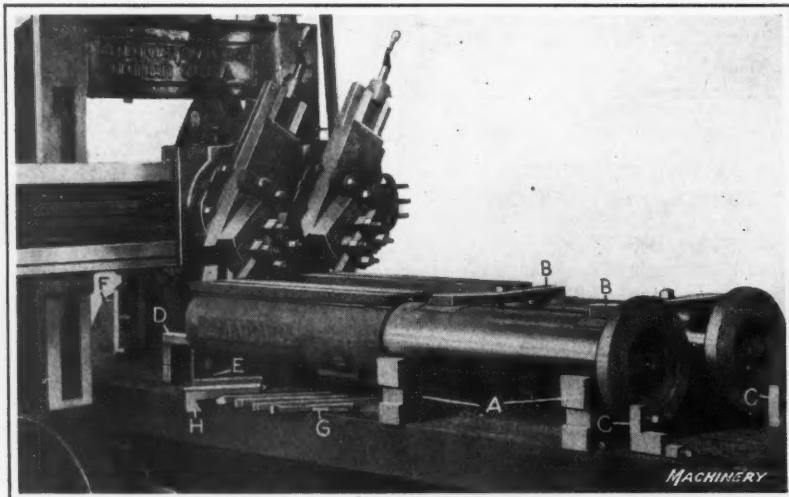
Simultaneously planing Dovetailed Bearing for Sliding Head on Two Upright Drilling Machine Columns
